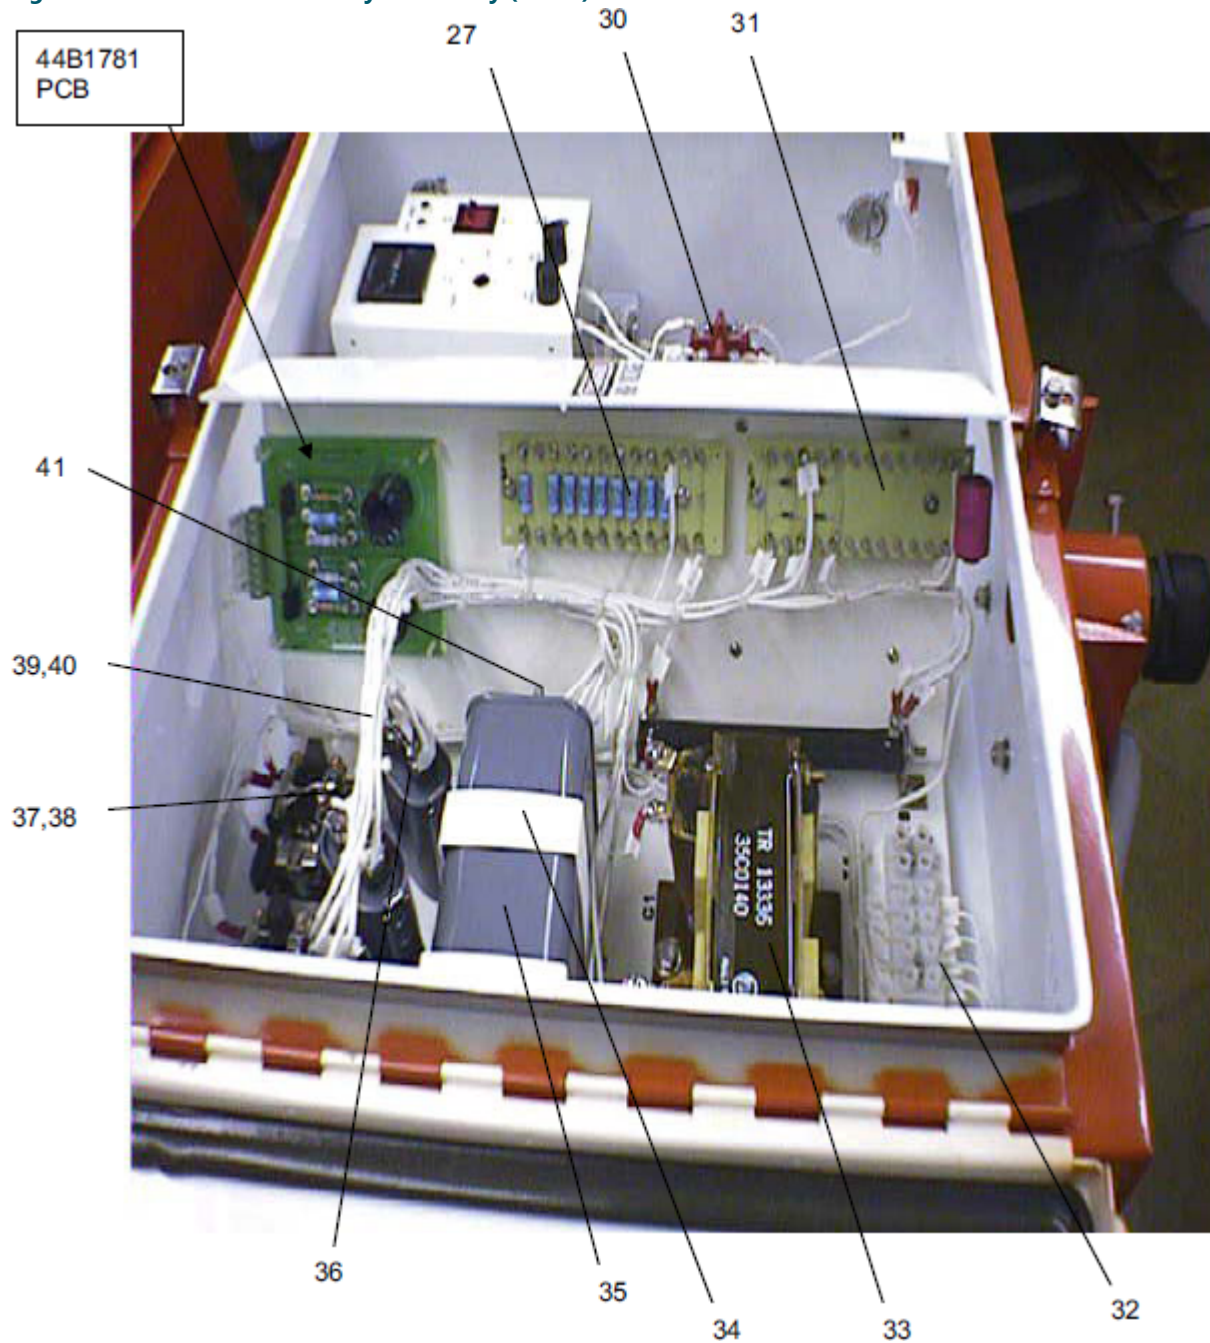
L-849A Panel Assembly Secondary (1 of 2)
